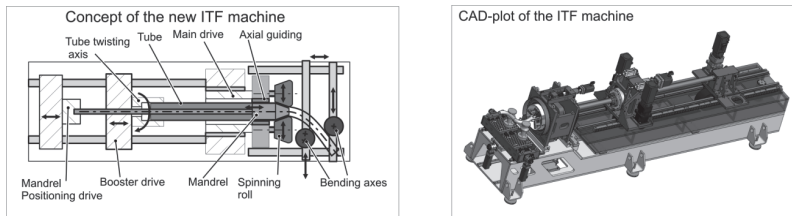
Machine concept and CAD-plot of new machine [Hermes, 2011]
